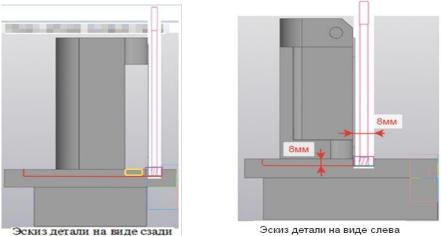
View of the blank showing the inaccessible area for the end mill when machining a pocket (a) and the minimum slot width (b).
